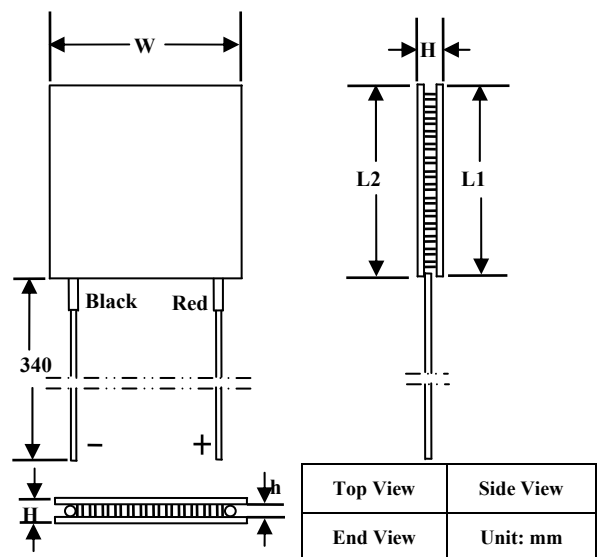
Mechanical Dimensions of Non-sealed TEC-71
